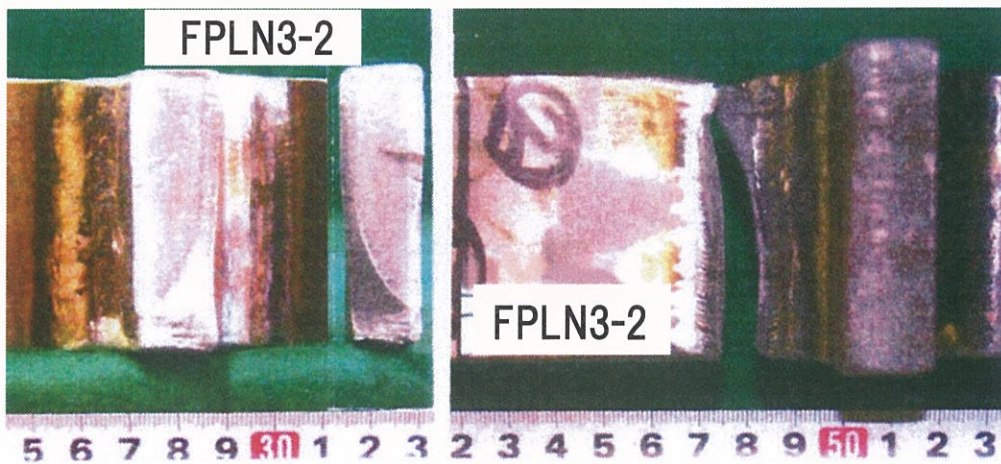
Fracture surface and pass after fatigue test
